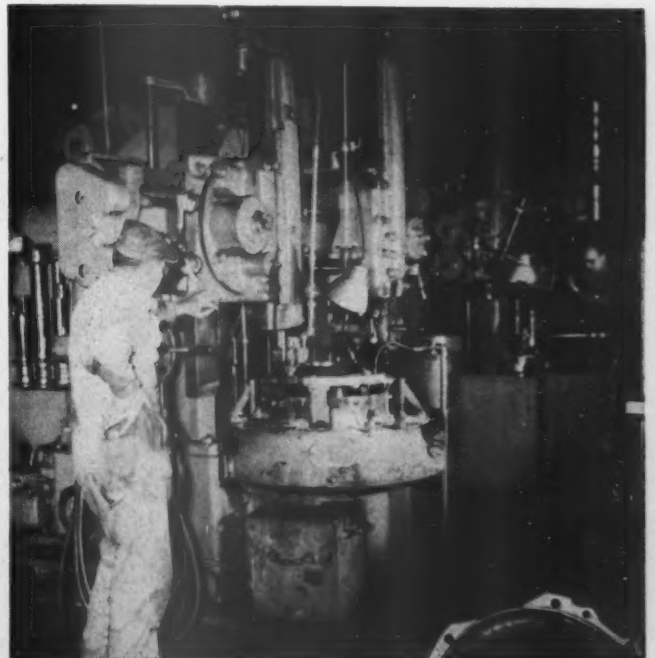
In the foreground is a 40-in. Colburn boring mill being used for grinding pinion end housings—Beyond it is a 36-in. Bullard vertical turret lathe being used for boring and grinding bearing caps
